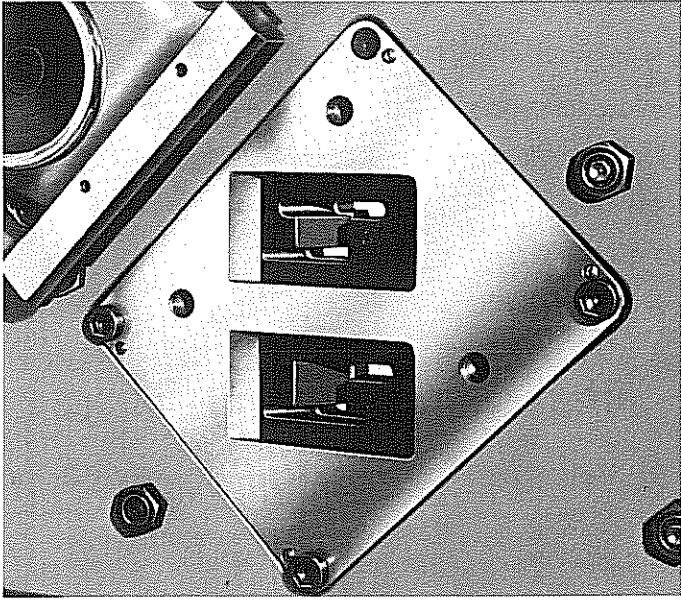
Section blades for mitre cutting of sections used in dwellings
